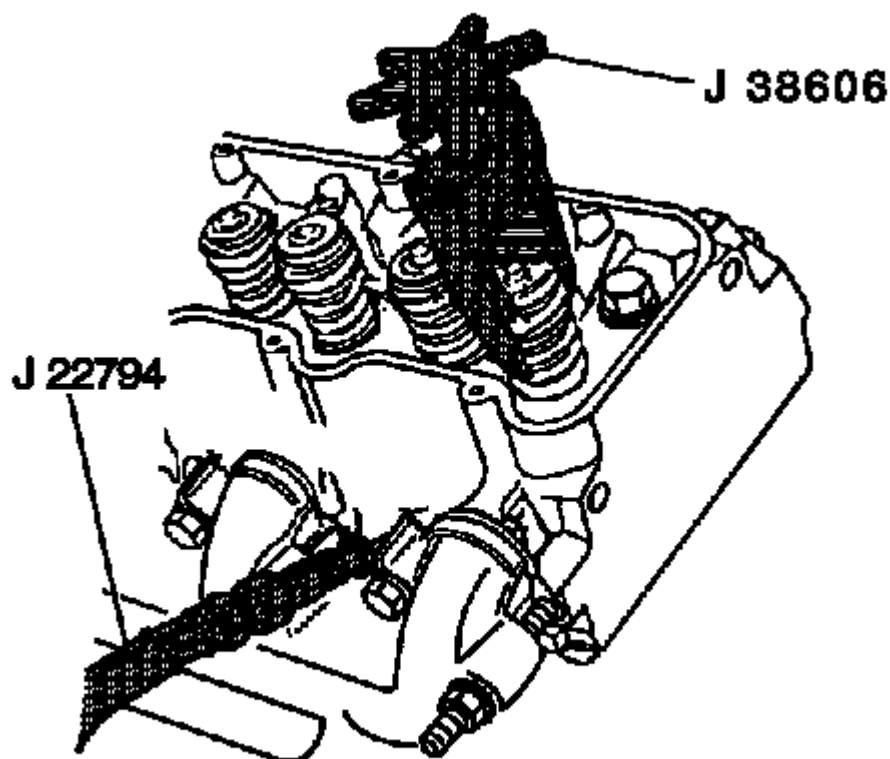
Compressing Valve Spring (Cylinder Head Installed) Using Special Tools
